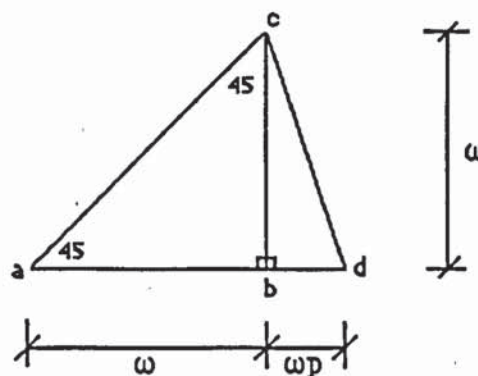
Geometry of tensile fillet weld $abcd$.
